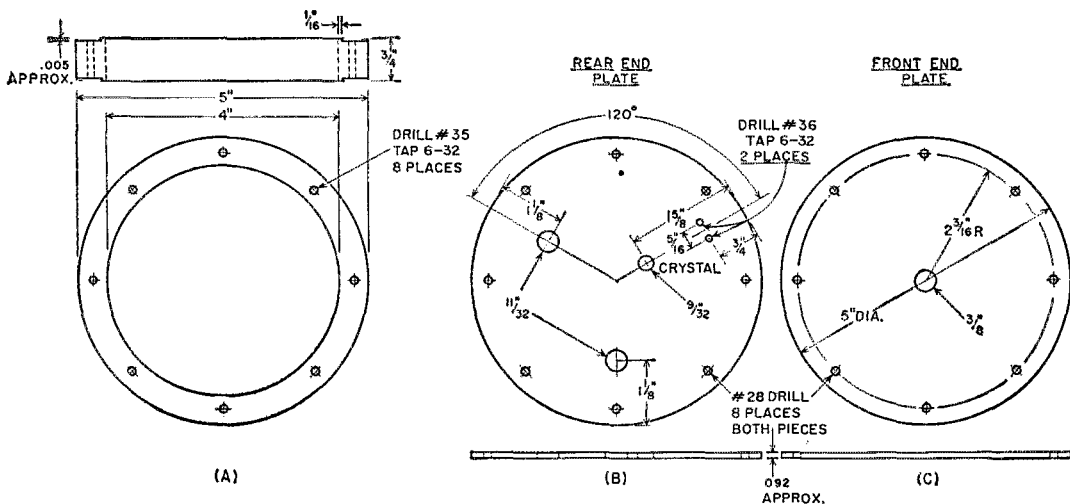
Dimensions of the principal parts of the radial cavity. Material may be aluminum or brass.
